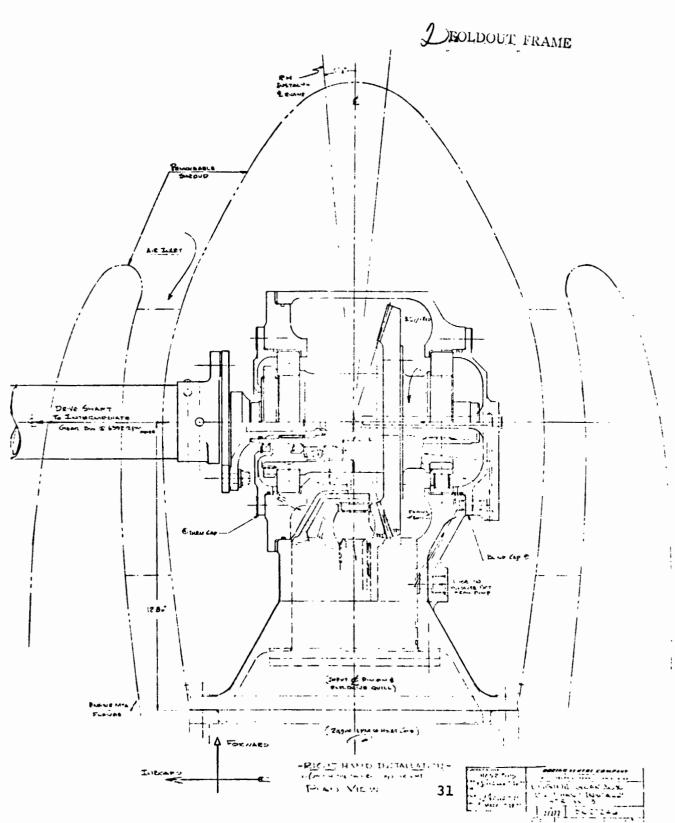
ENGINE GEARBOX - RIGHTHAND INSTALLATION - HTR XV-15
